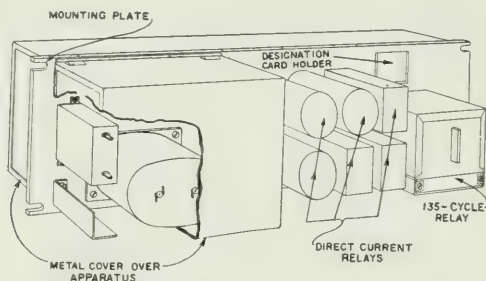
Typical Assembly of 135-Cycle Composite Ringer Set
